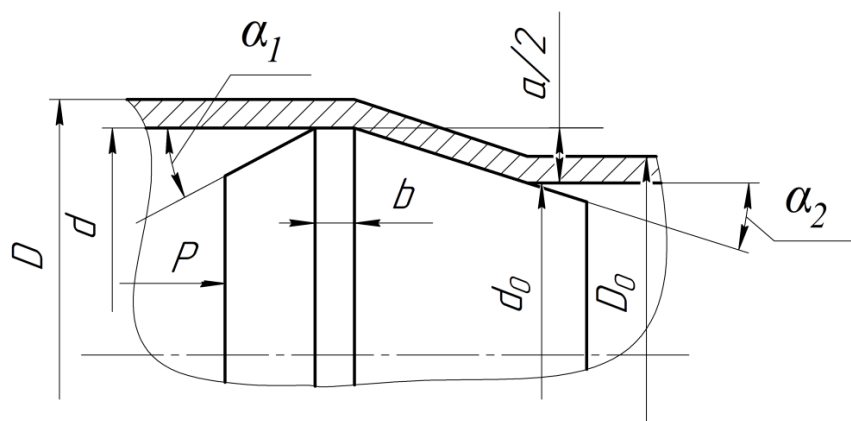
Diagram of the parameters of the hole cold expansion process (P — Compression of the force; D — External diameter of the workpiece after expansion; d — Internal diameter of the workpiece after expansion (diameter of the dorn); D0 — External diameter of the workpiece before expansion; d0 — Internal diameter of the workpiece before expansion ; b — width of the cylindrical ribbon; α_1 -back corners of the dorn; α_2 — front angles of the mandrel; a — absolute interference on the dorn)
